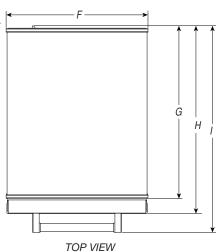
DETAILED PLANNING DIMENSIONS 18" ICE MACHINES
